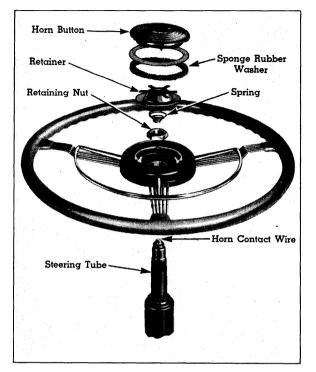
Steering Wheel—Disassembled Typical of All Series
